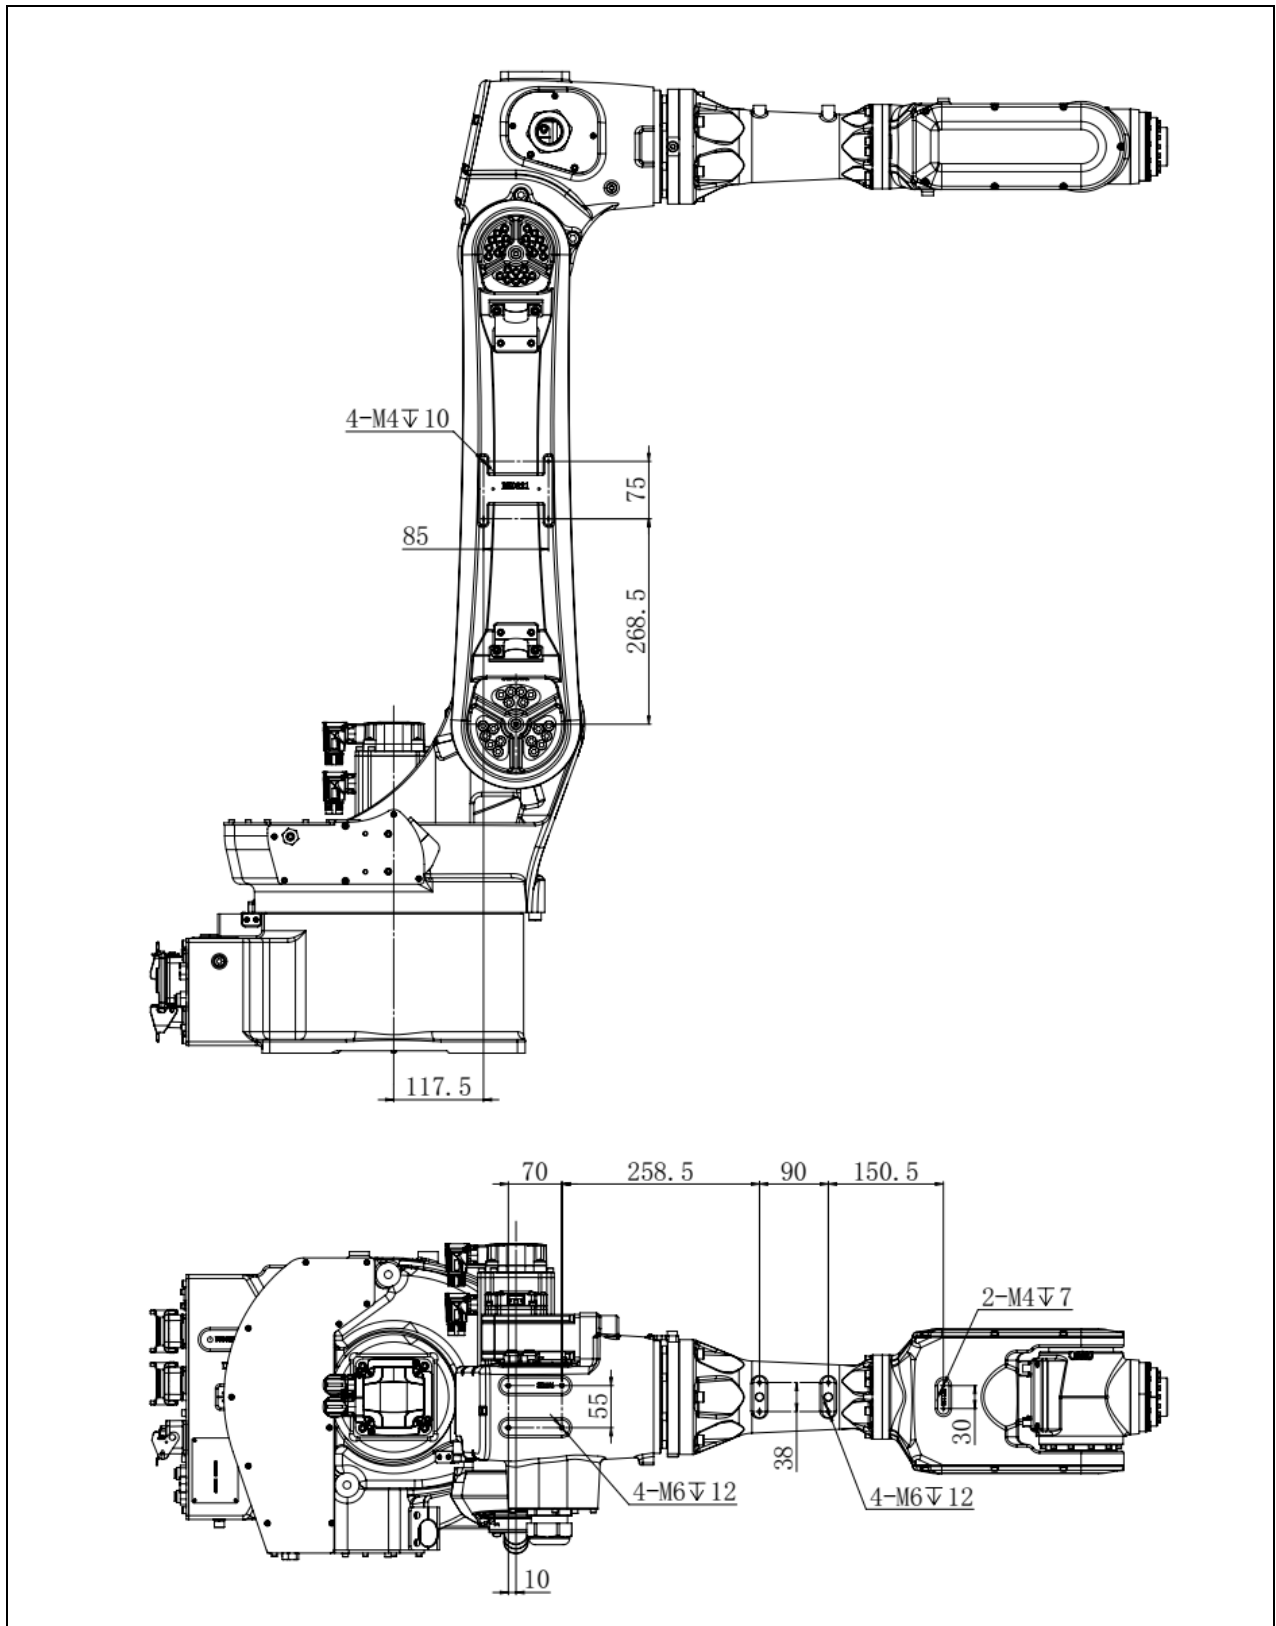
Equipment mounting face (ER12B-1510-LI, ER12B-1510)
